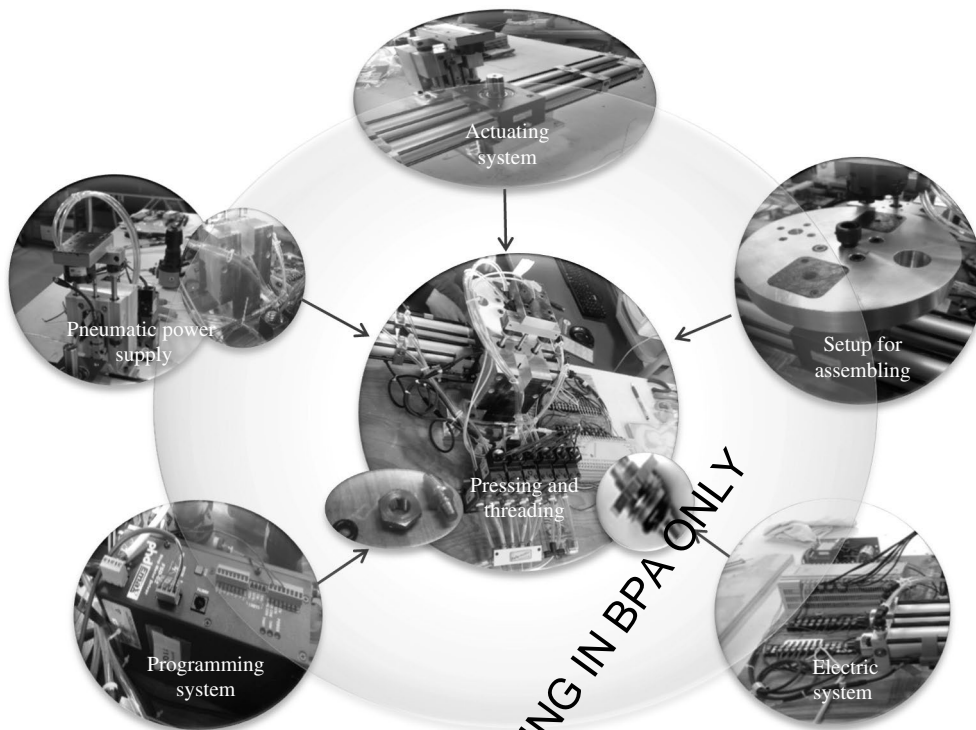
Mechatronic design of semi-automated valve assembly workstation
